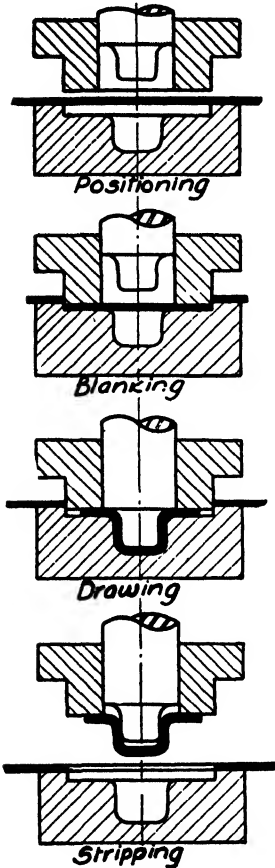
Combination Blanking and Drawing Die for Double Action Press.
